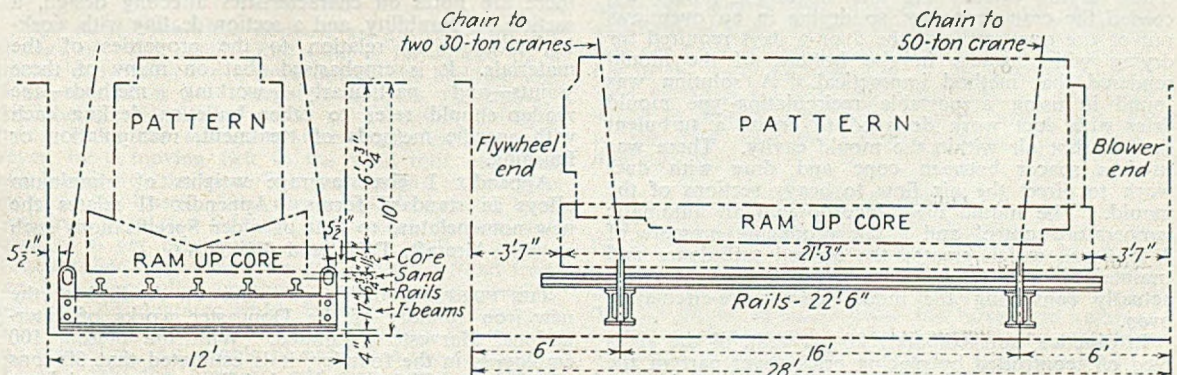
ARRANGEMENT FOR PIT-MOULDING THE ENGINE BASE CASTING. NOTE: PAIRS OF I-BEAMS, ASSEMBLED TO FORM LIFTING BEAMS.
